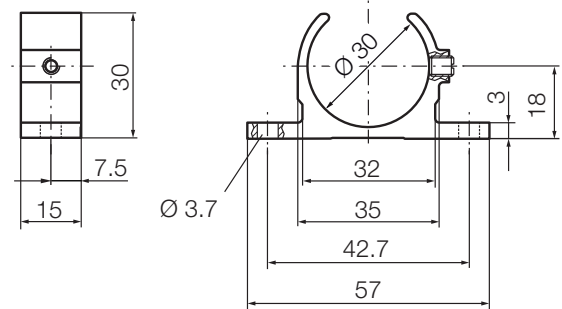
Mounting bracket BTL6-A-MF01-A-43
